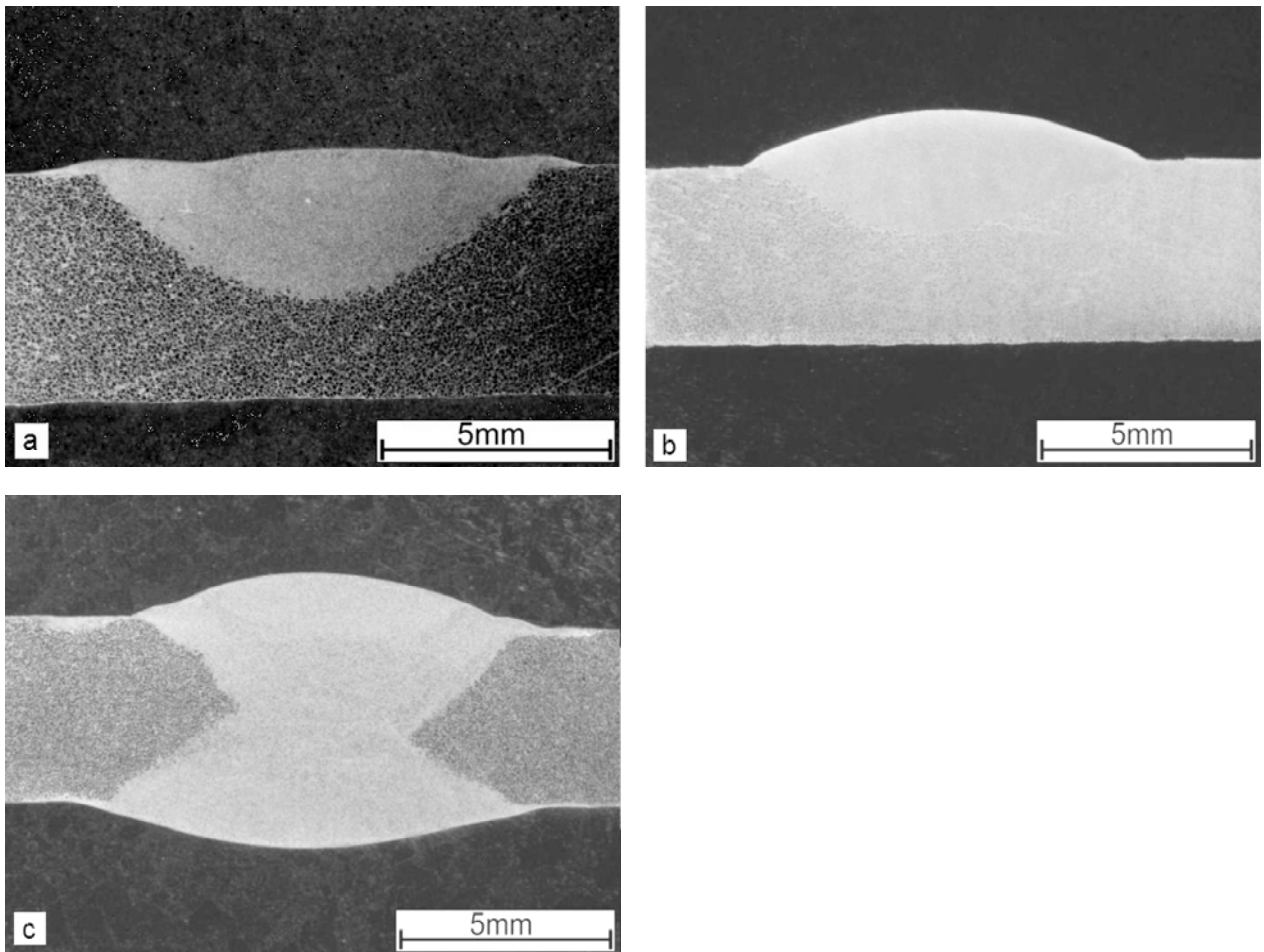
Macrostructure of the conducted padded welds and butt joints of EN-MCMgRE3Zn2Zr alloy in delivery state
